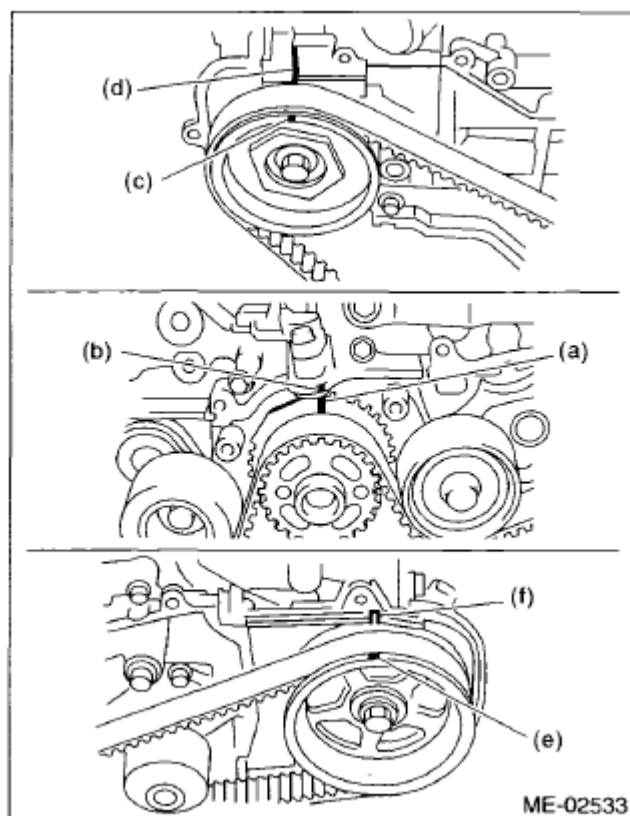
Aligning Mark Of Sprocket To Oil Pump
